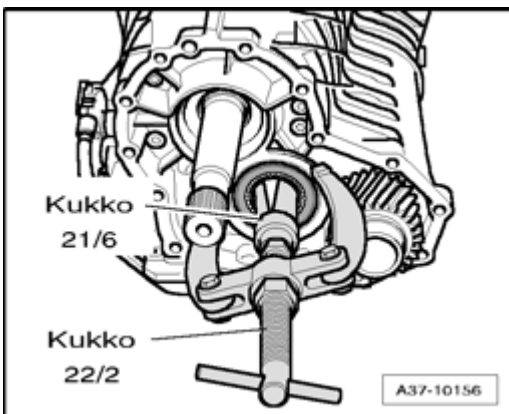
Pulling Out Bearing For Intermediate Pinion Using Kukko Extractor Kukko 21/6 And Kukko Support Kukko 22/2
